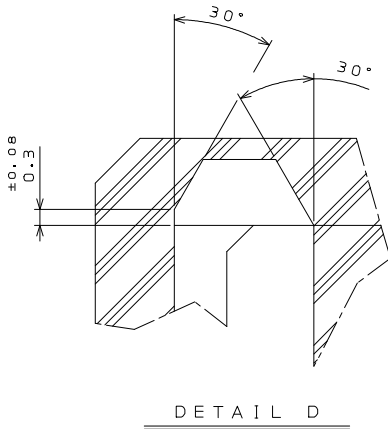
7.0 mm Slimline device plug connector interface dimensions detail D
